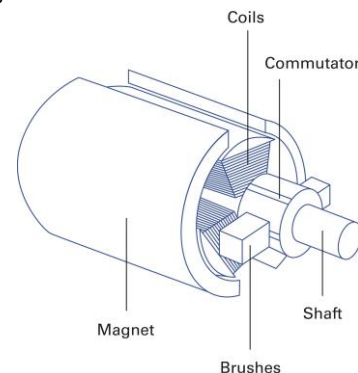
DC motor design with stator magnet, rotor windings, commutator, brushes, and motor shaft.
